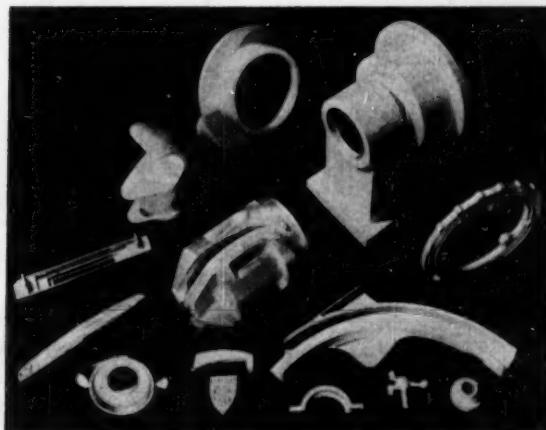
Typical casting applications of the plaster process. Small castings, in foreground, are particularly attractive as cast with plaster. The size of these small parts can be judged by the Alcoa shield, bottom center, which is about 2 in. high.
